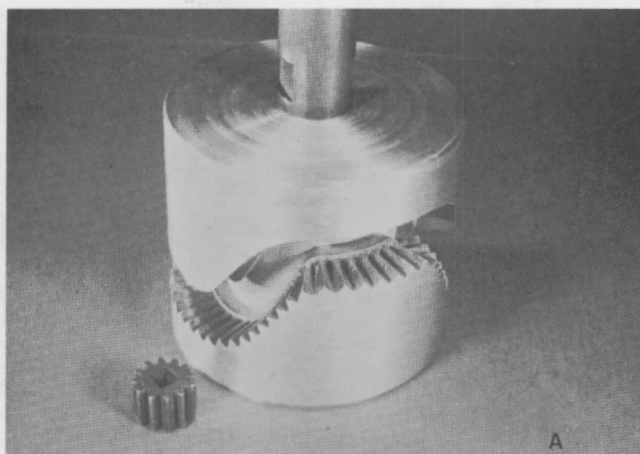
Complex workpiece machined with CNC-die sinking EDM using simultaneously X-, Y-, Z- axis and additional A-axis (rotation of the workpiece). At the left side, the wire-cut created tool electrode.
